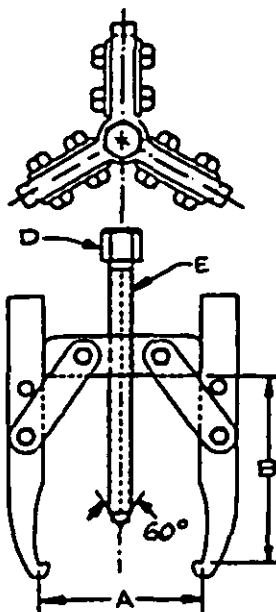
Type I, class 2, style A, puller mechanical, gear and bearing, three-jaw, external, single end grip. (See Table I for size specification.)
